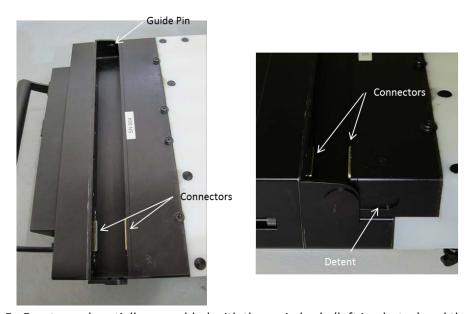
Front panel partially assembled with the main body (left in photos) and the back panel (bottom in photos)
